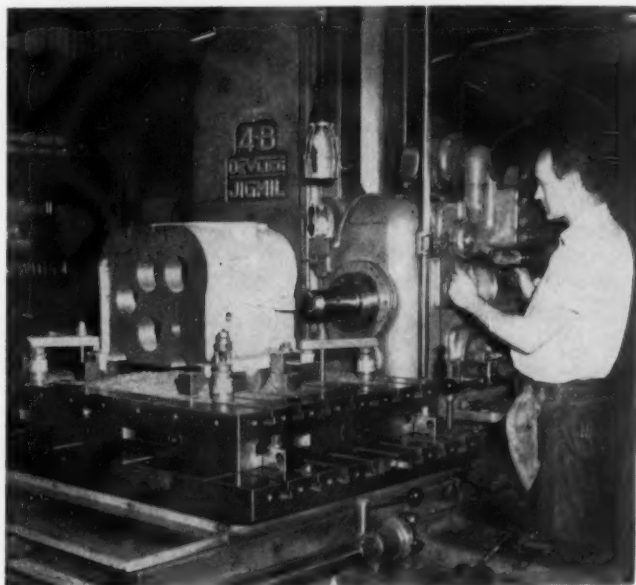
Highly accurate boring of through-holes on gear housing for King vertical boring and turning machine is possible with the DeVlieg JIGMIL shown here.
